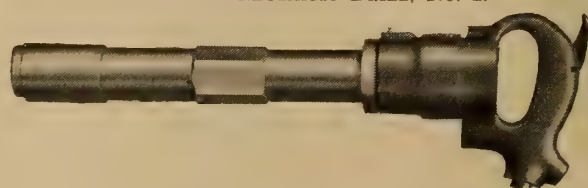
PNEUMATIC RIVETING HAMMER, No. 6.
